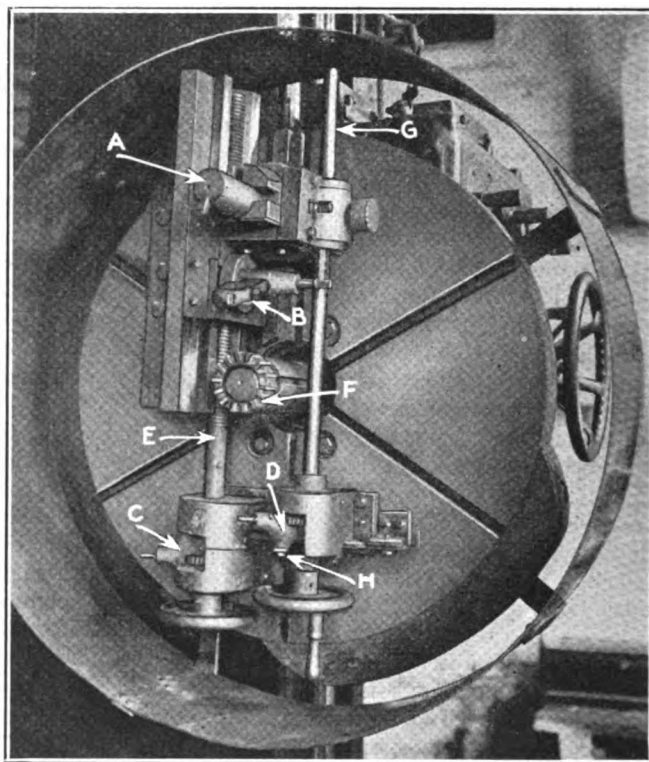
ATTACHMENT ON BORING MACHINE FACEPLATE
